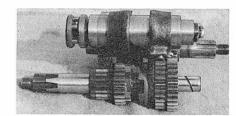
View of F3 transmission and shifter assembly ready for installation in case.
